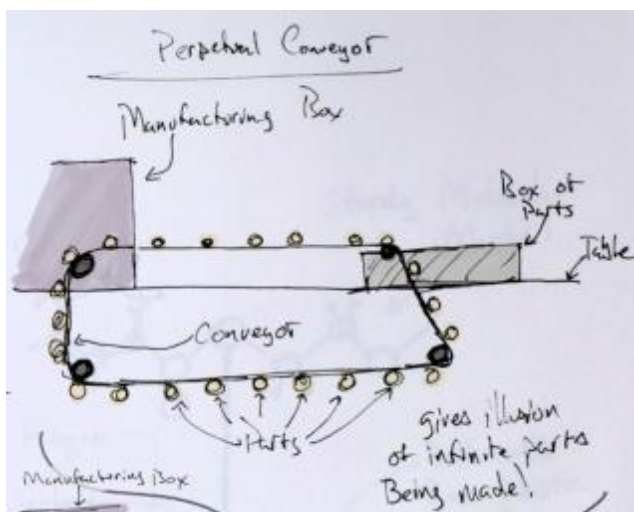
Perpetual conveyor of 3D printed parts.
